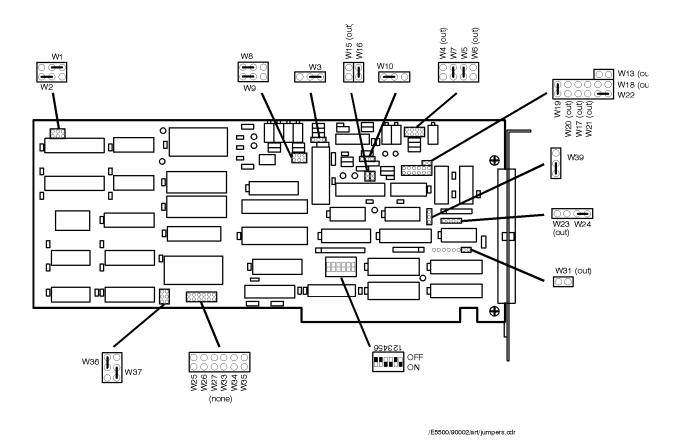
Jumper and DIP Switch Settings on the PC Digitizer Card
